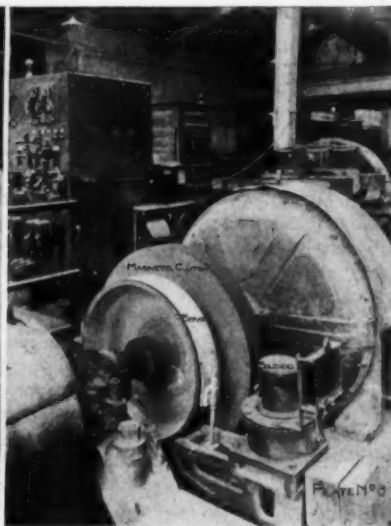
THE BRAKE ON THE MAGNETIC CLUTCH SHOULD BE OPERATED BY A COUNTERWEIGHT
